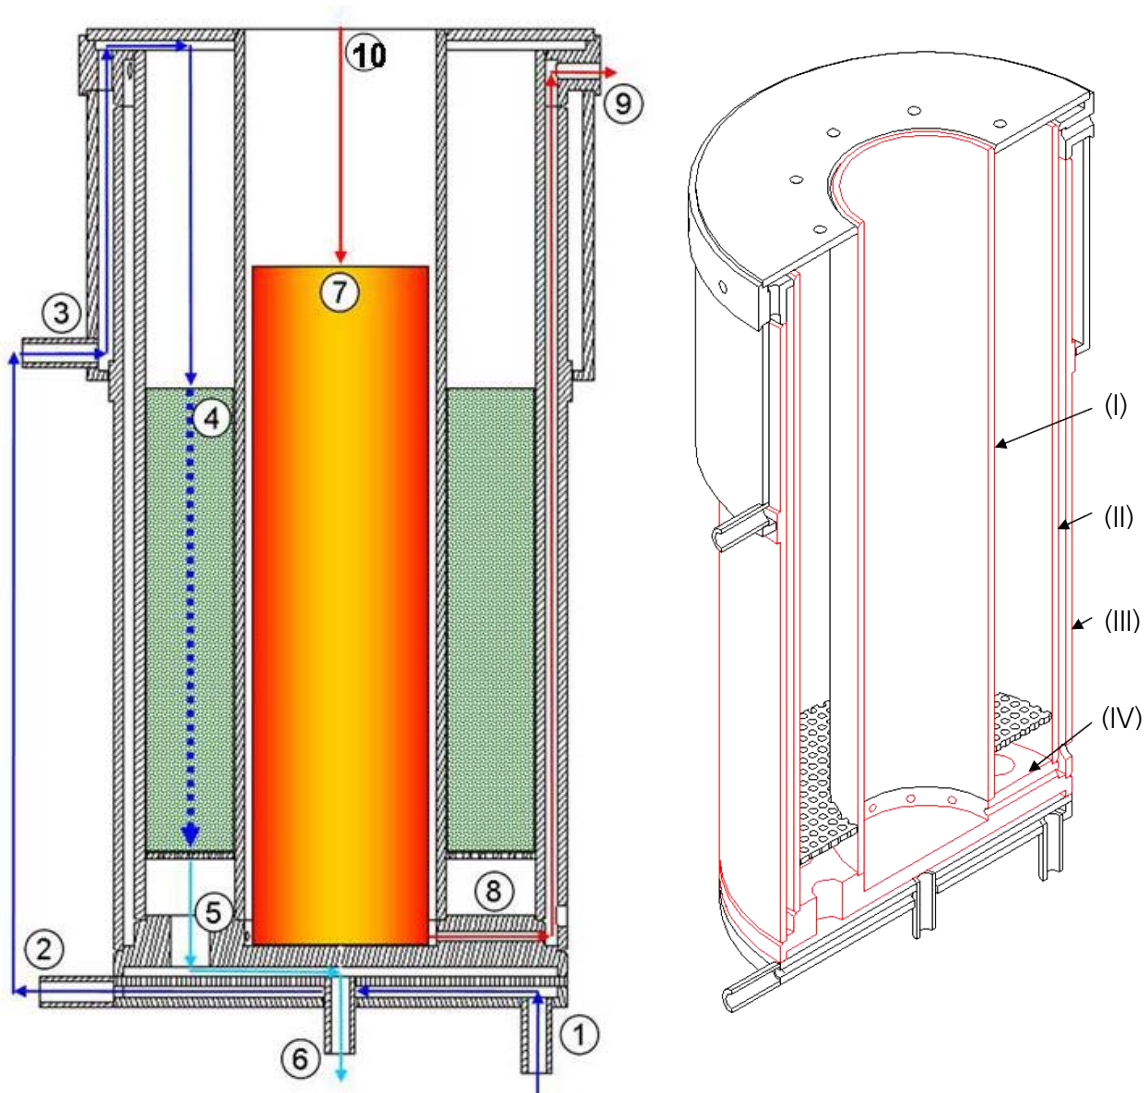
Left: Sketch of the new cylindrical reformer/burner reactor with gas flow paths; Right: Cross section of the reactor with (I) burner tube, (II) reformer tube, (III) outer tube, (IV) base plate.
